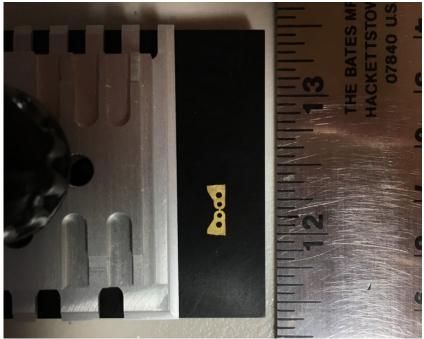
Torpedo tube bracket after being cut out of the brass fret.
